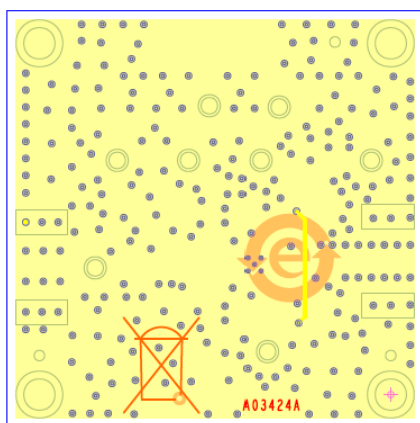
ADL5906 Evaluation Board Layout, Bottom Side
